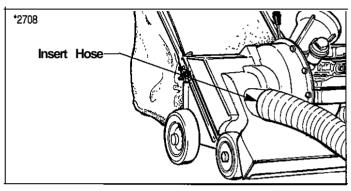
Insert Vacuum Hose Connector Into Hose Intake Opening
